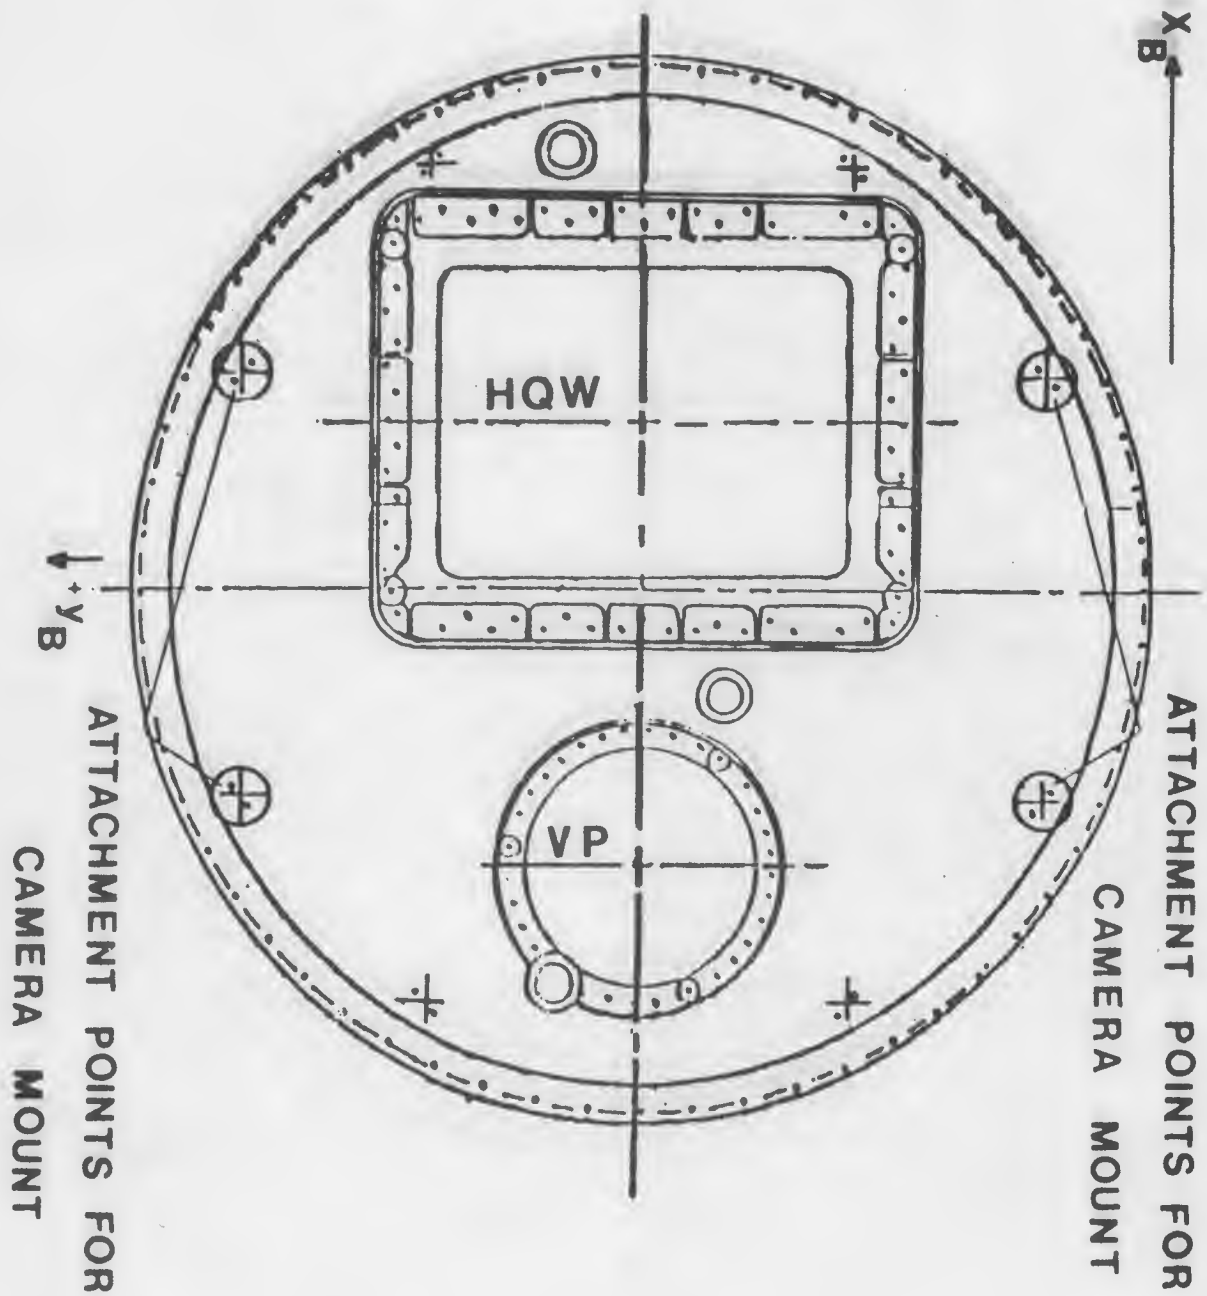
Spacelab Window Adapter Assembly. (Internal View)
